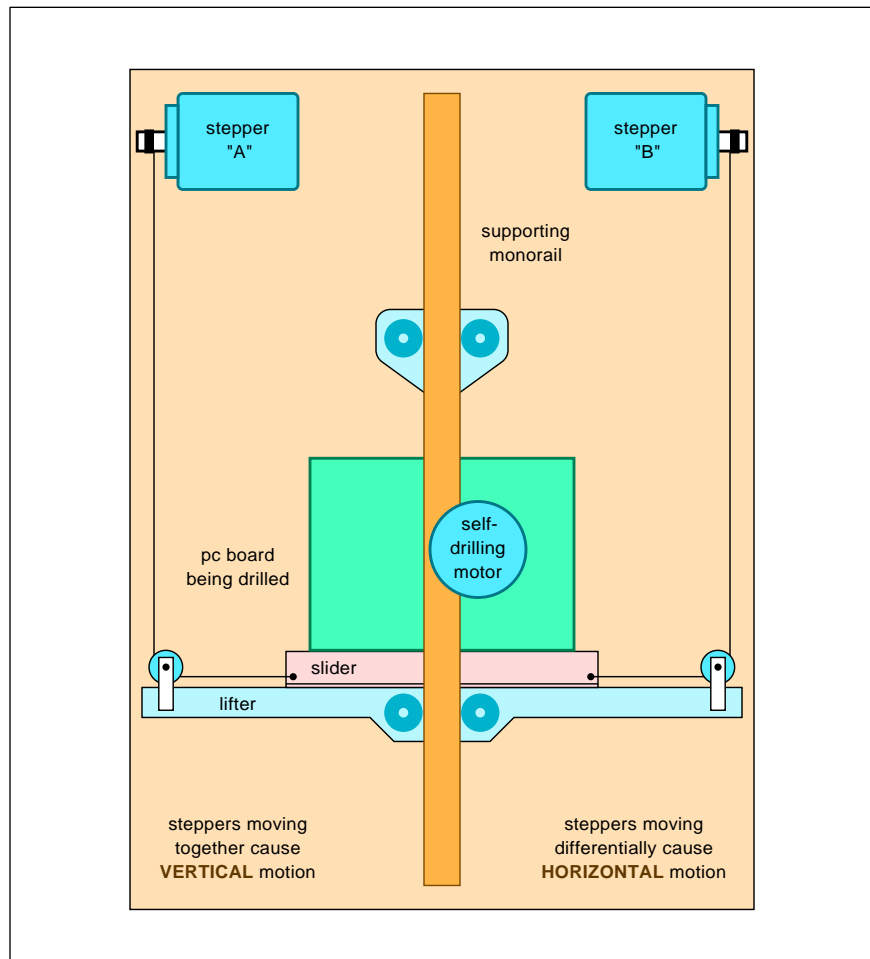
THIS NEW PCD100 PRINTED CIRCUIT DRILL is largely gravity powered! Differential stepper motions move your pc board under a fixed self-advancing drill or a plotting pen.
